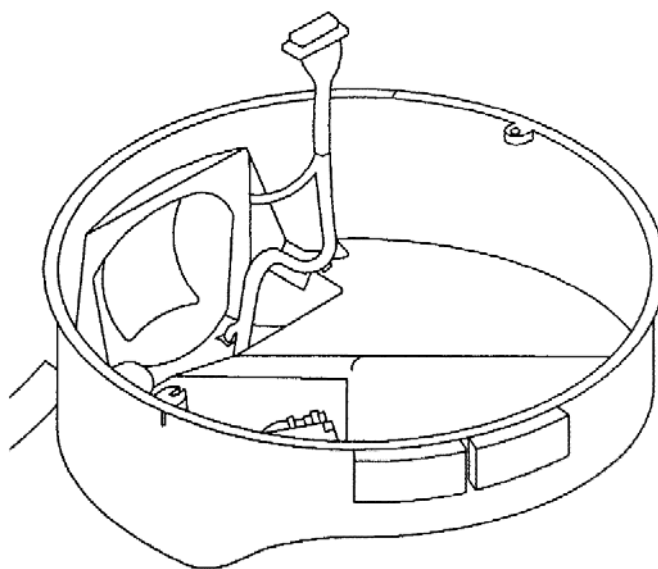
PNVs Shroud Assembly (AH-64A/D)
